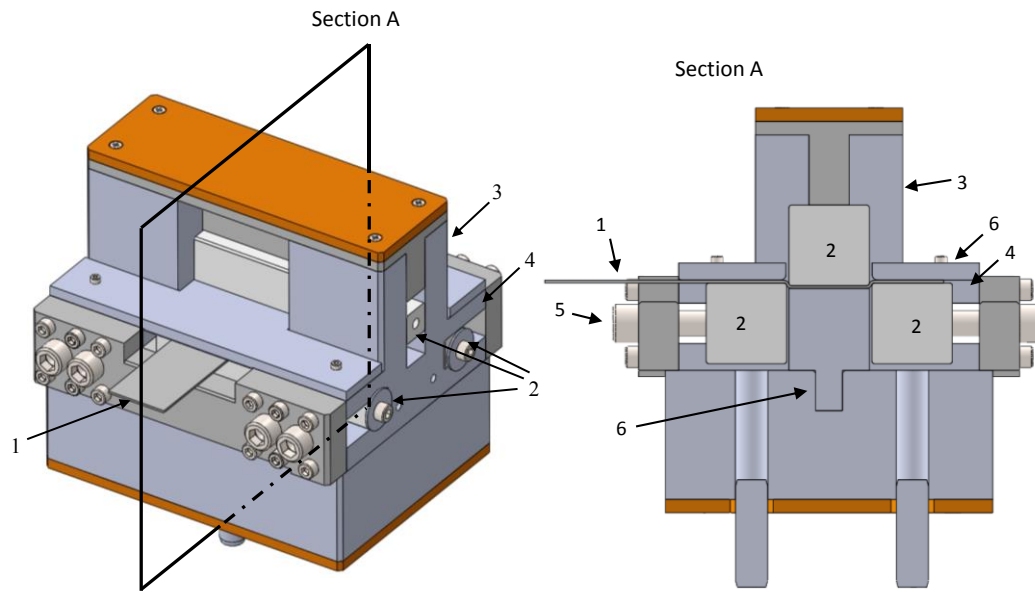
Schematic illustration of the drawbead tool with a cross-sectional view of the main tool components.
